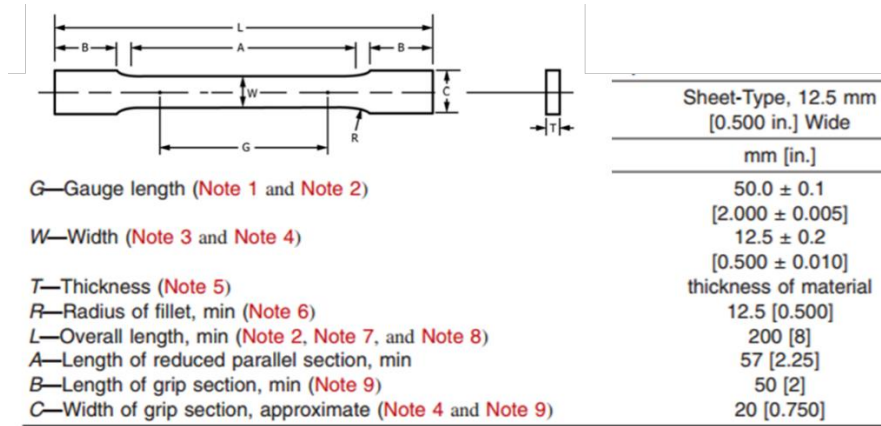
Test specimen geometry for sheet-type specimens [ASTM E8-16 (2016)].
